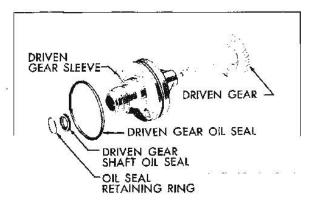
Speedometer Driven Gear and Sleeve Assembly – Expladed View
